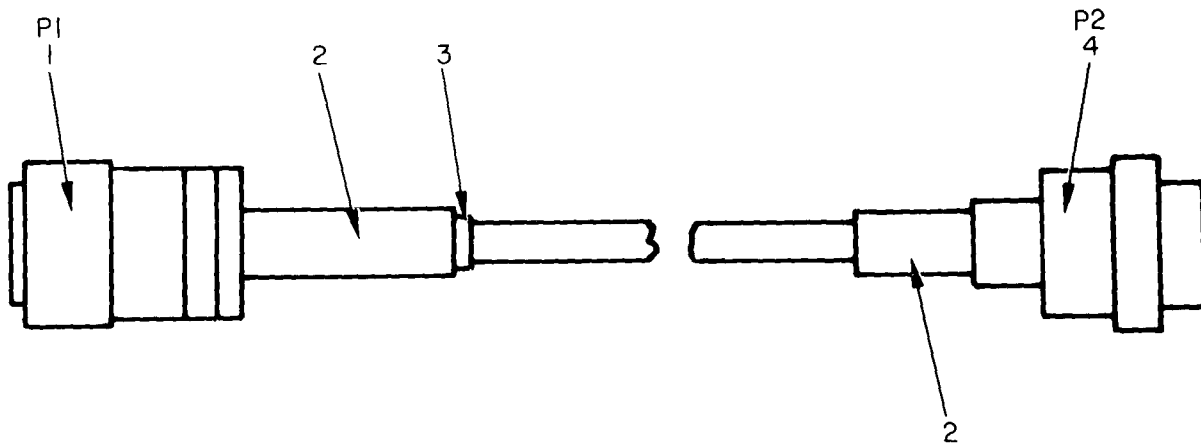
Cable Assembly, Special Purpose, Electrical CX-9002/URM-157.
